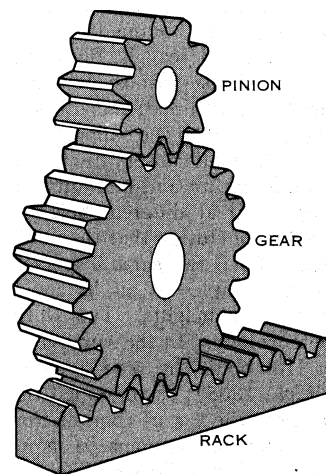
MESHING ACTION OF PINION, GEAR AND RACK
